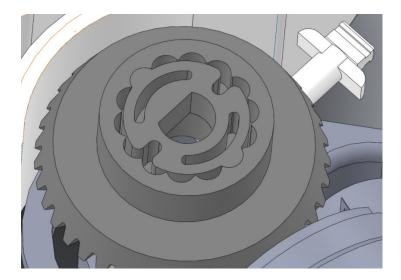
The flower shaped flexure in the arm joints prevents damaging gears and motors when over-torqued by external force.
